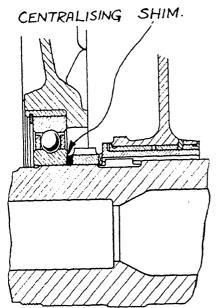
Diagram showing position of connecting rod assembly centralising shim.
